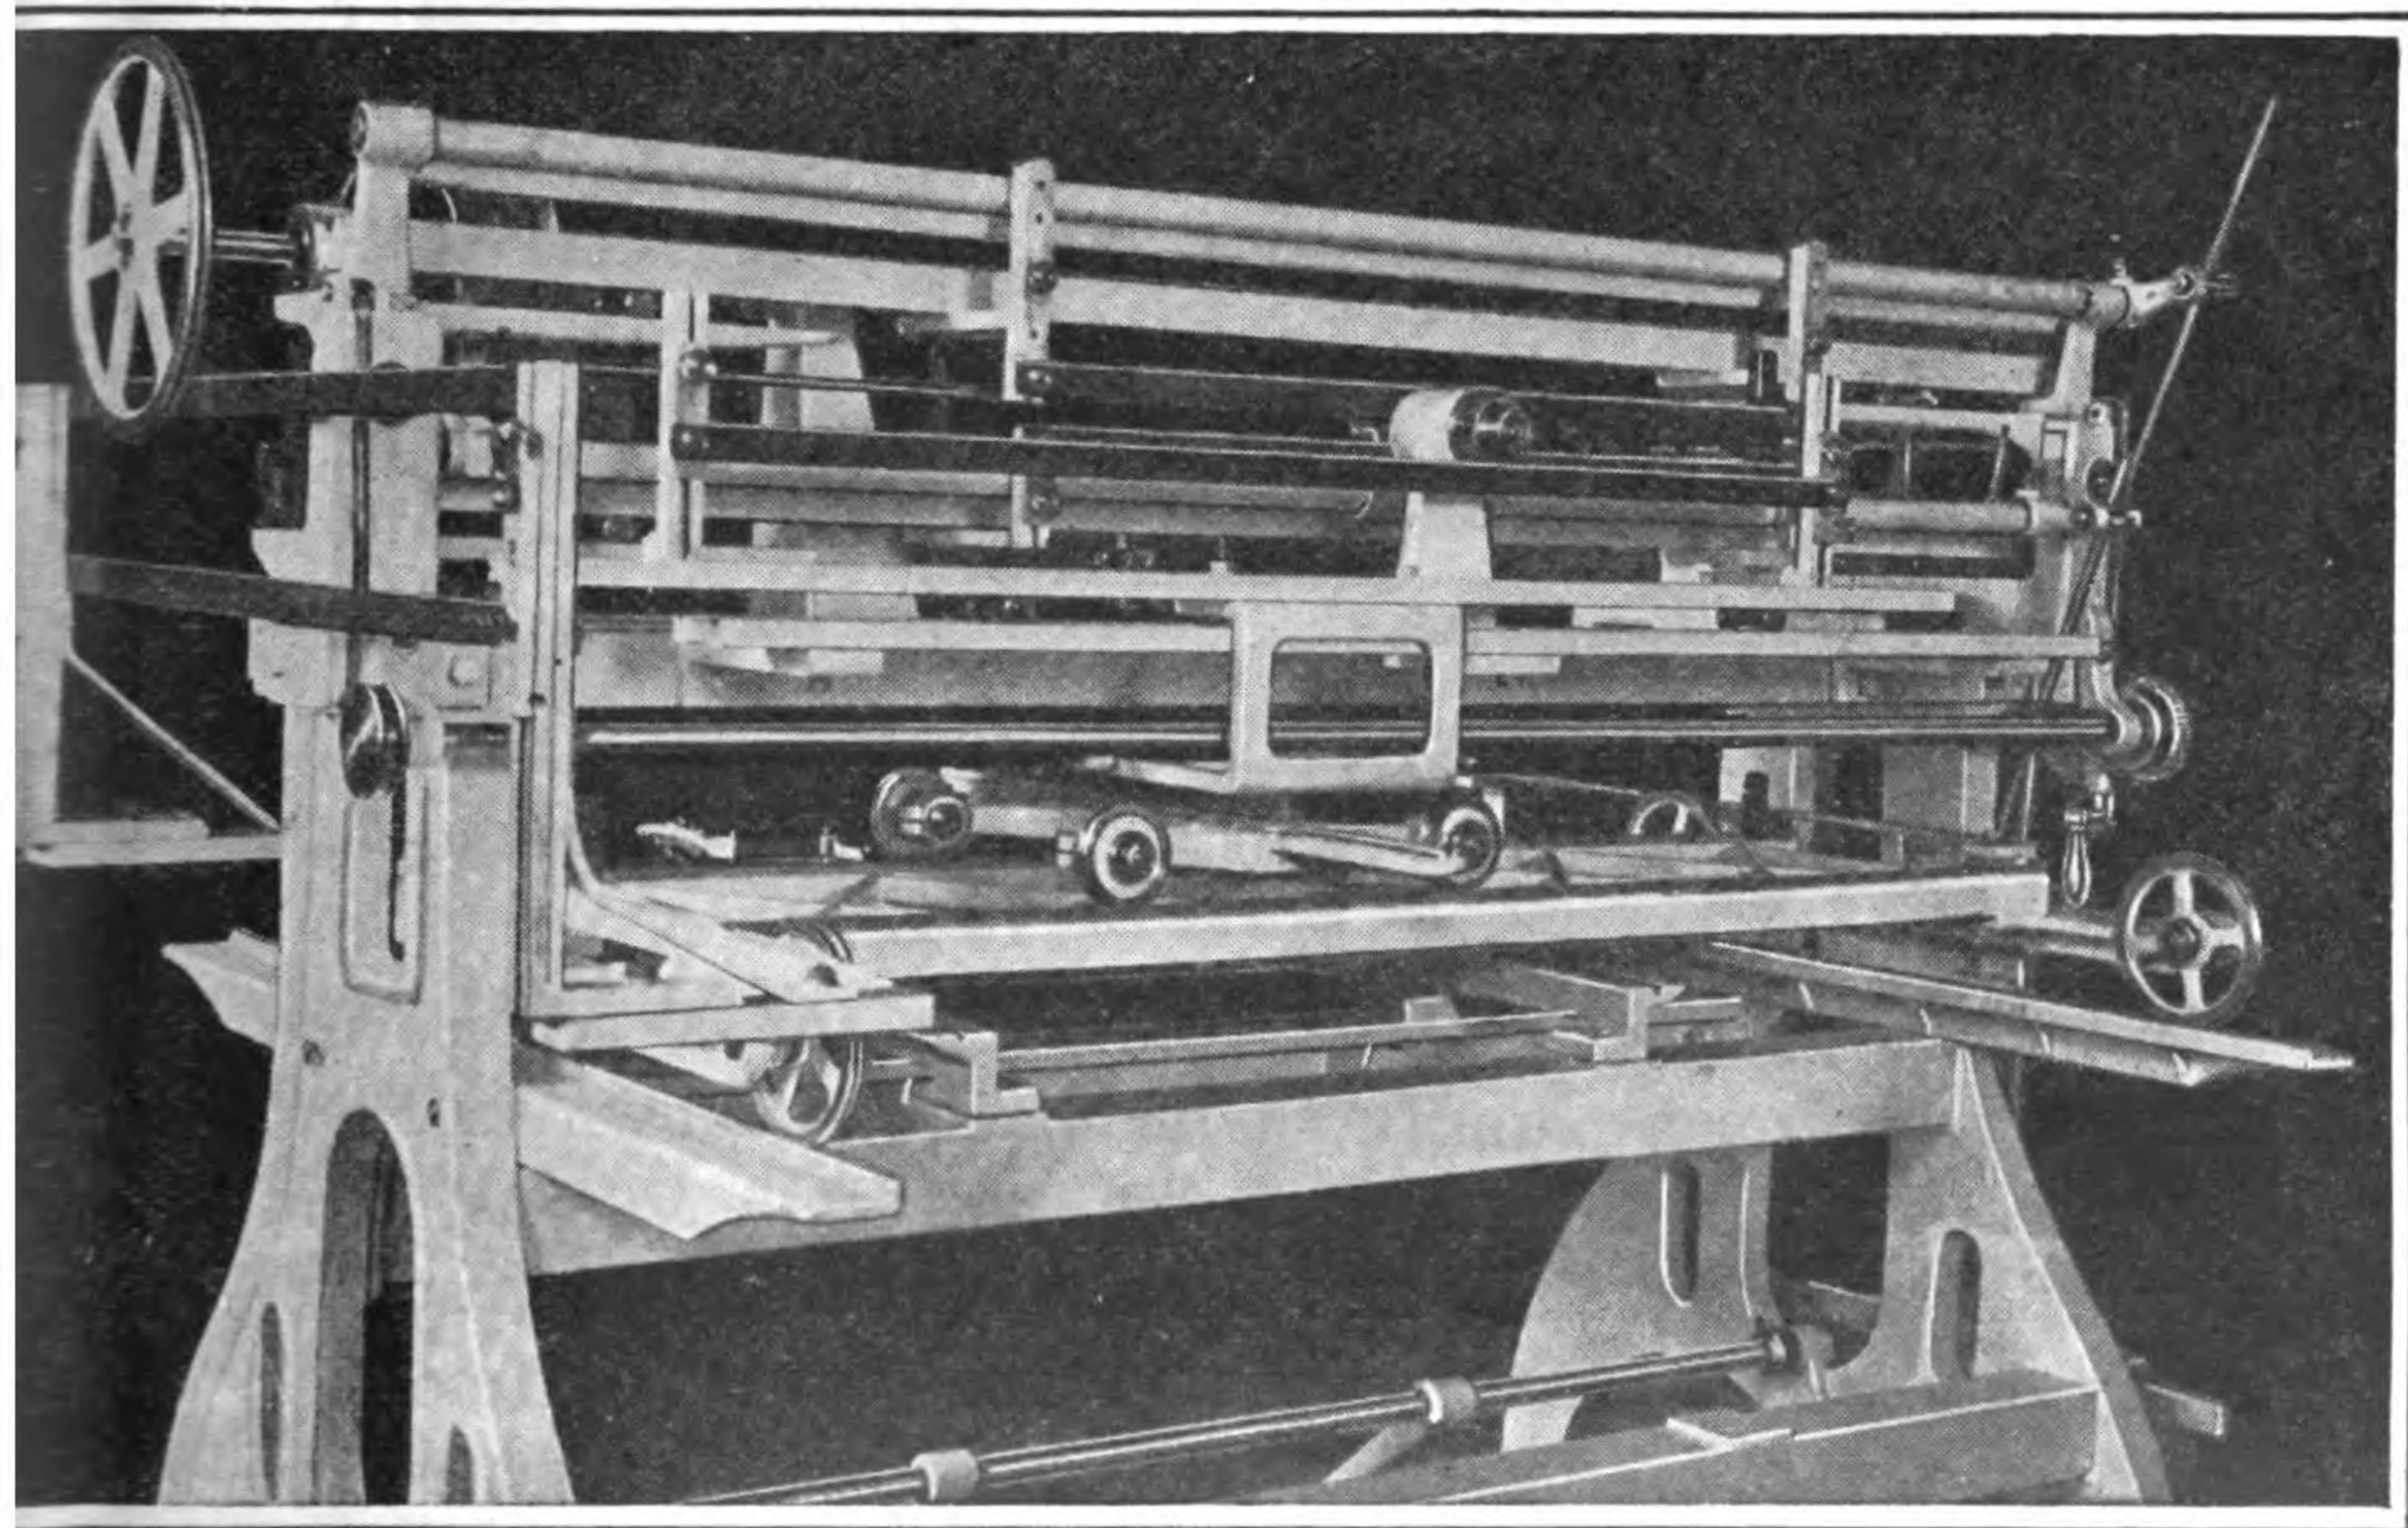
Opposite Side of Graduating Machine shown in Fig. 8
